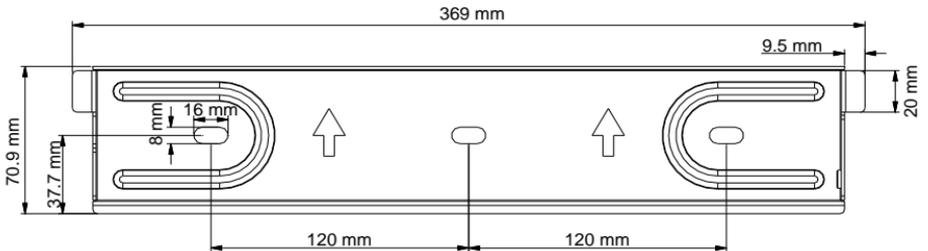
Dimensions of rear panel of R5-(7K, 8K)-S2-15
